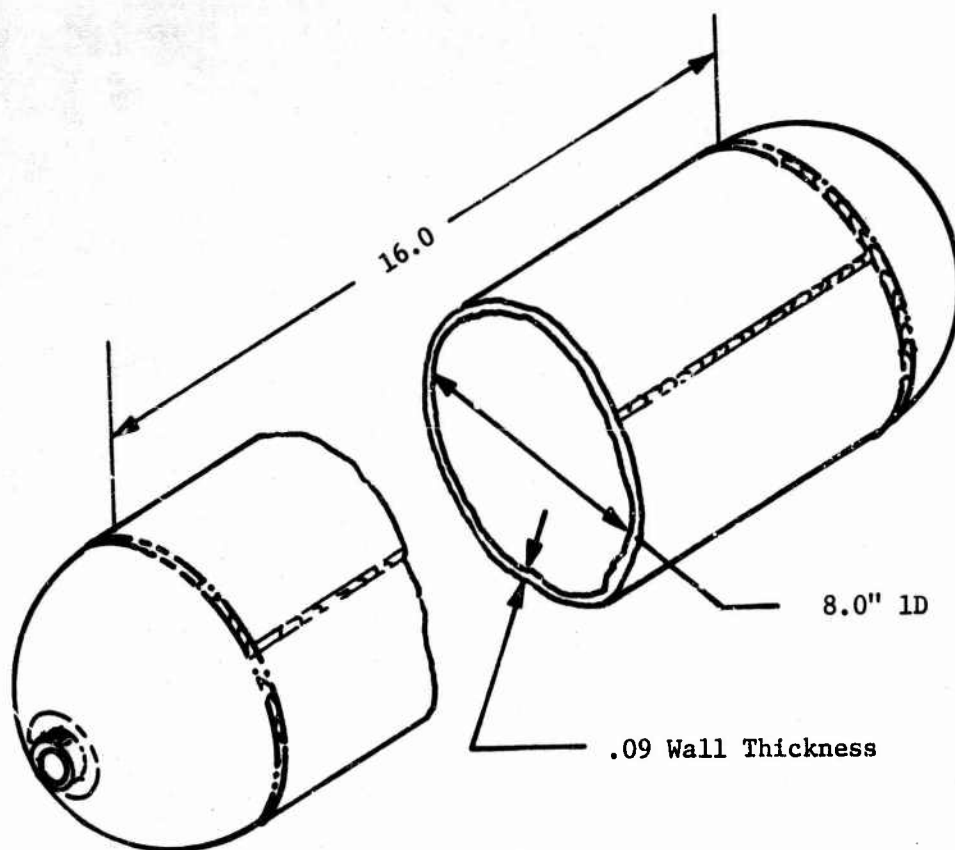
PRESSURE VESSEL, TYPICAL FAILURE AND DIMENSIONS
